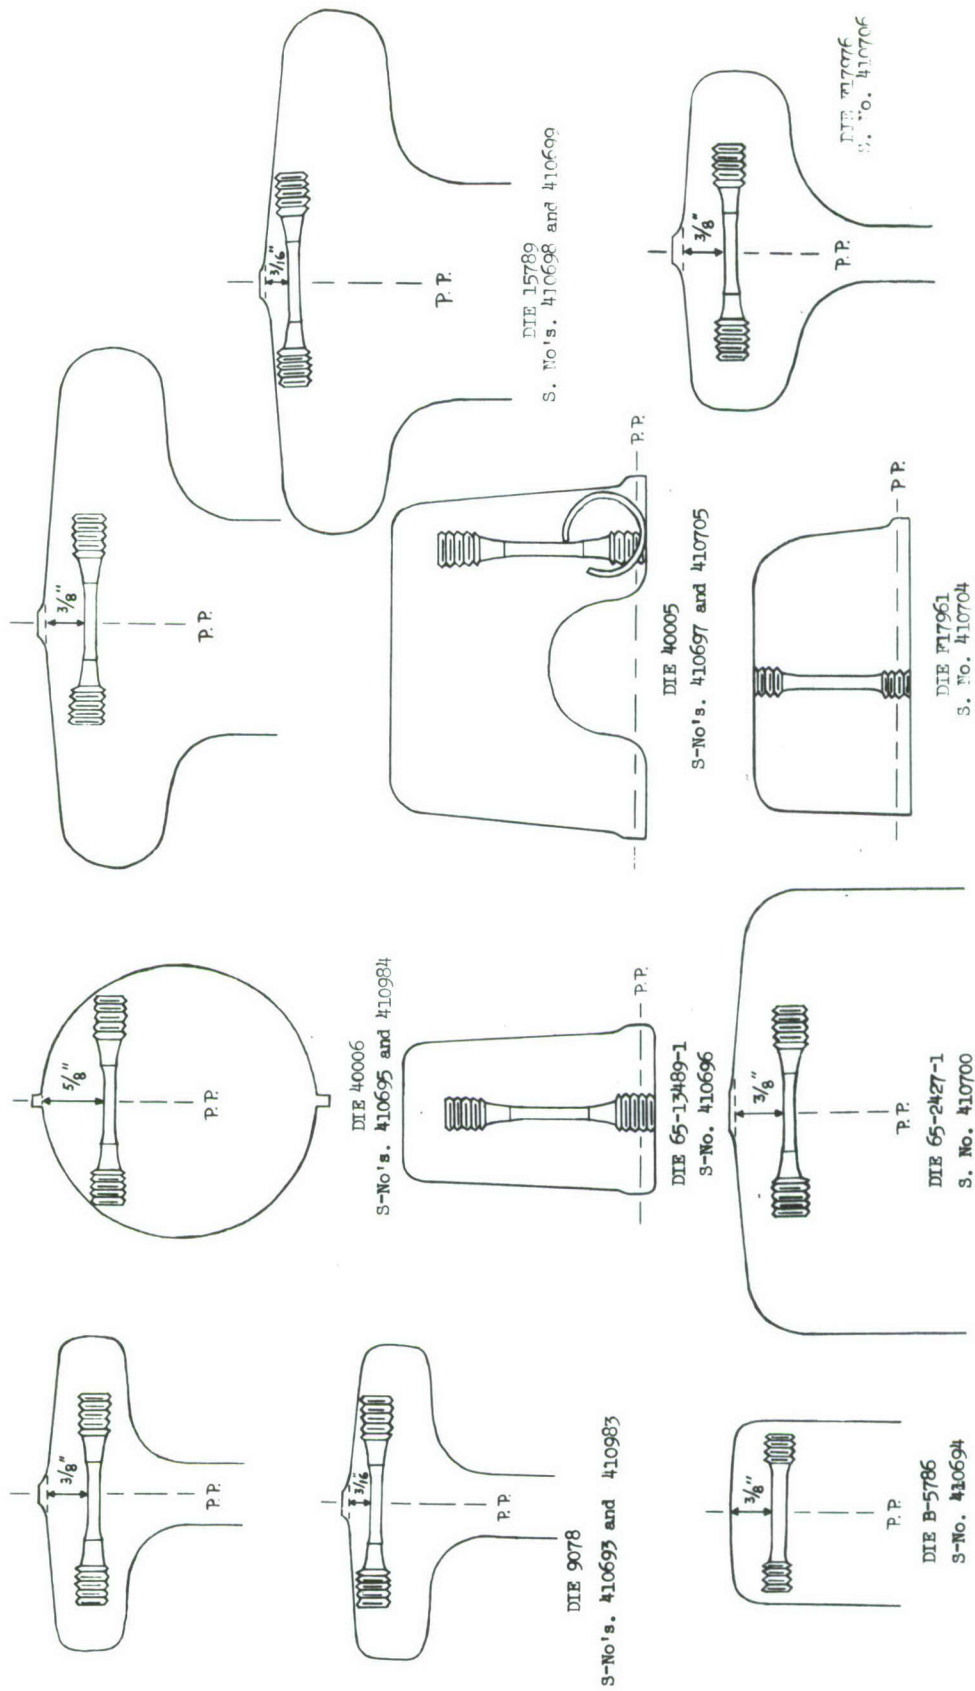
Sketch Showing Location of SCC Smooth Specimens on the Cross-Section of the Die Forgings.
